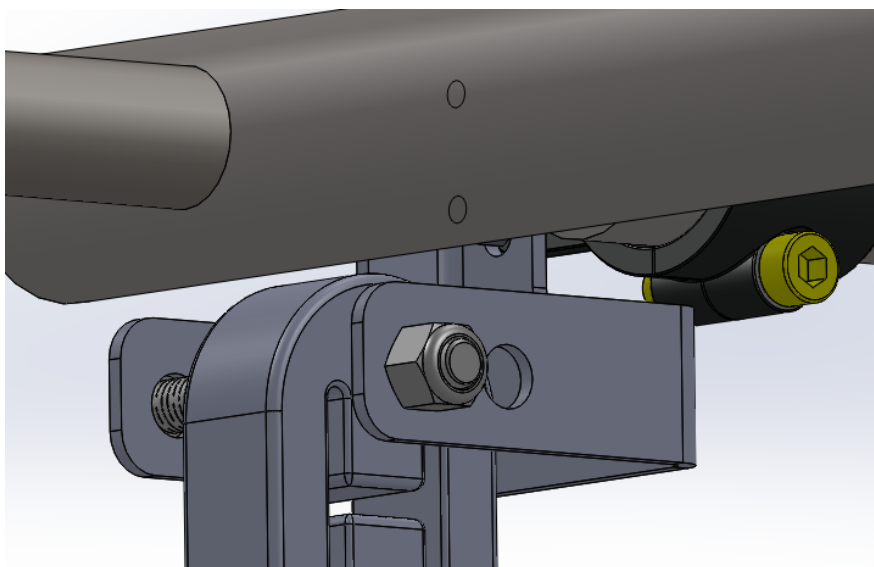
This figure shows the bracket, clamp, and hardware to be pre-assembled before installing on the vehicle.
